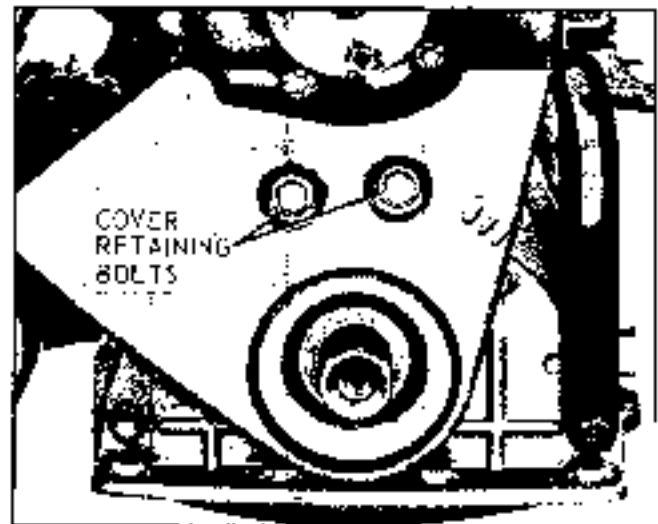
Lower Front Timing Cover Retaining Bolts
